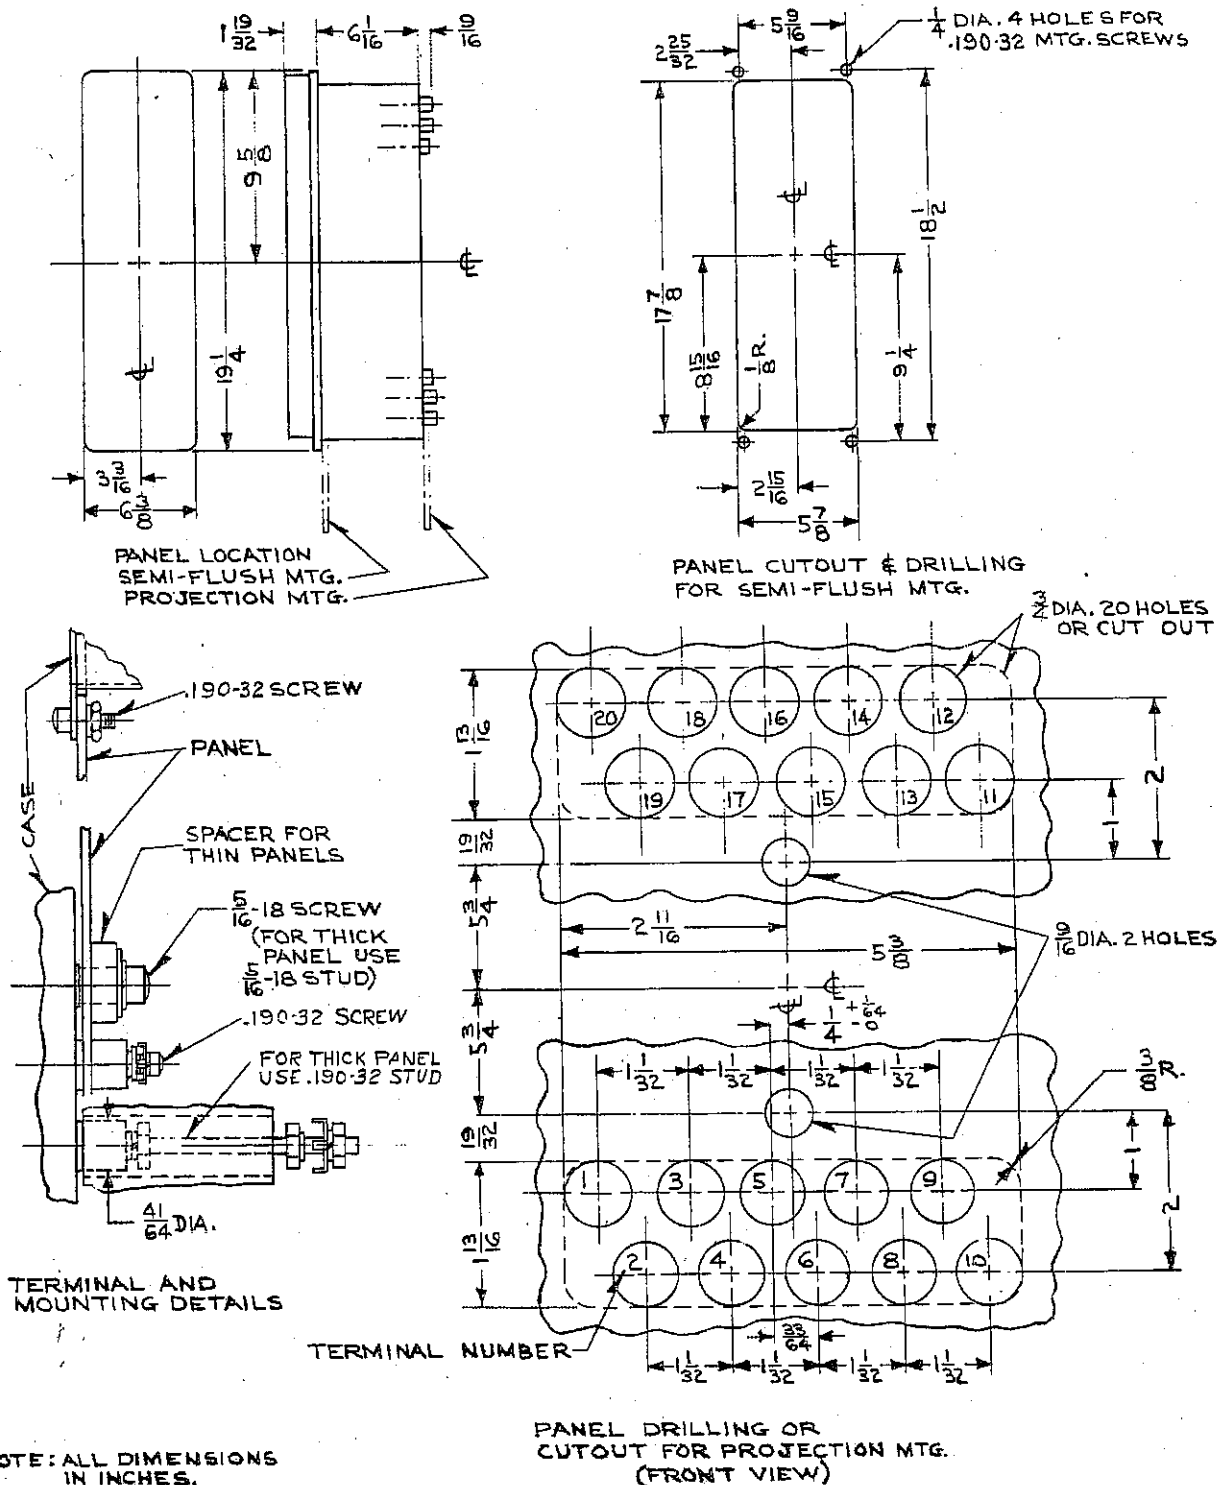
Outline and Drilling Plan of the Type W Test Switch.
